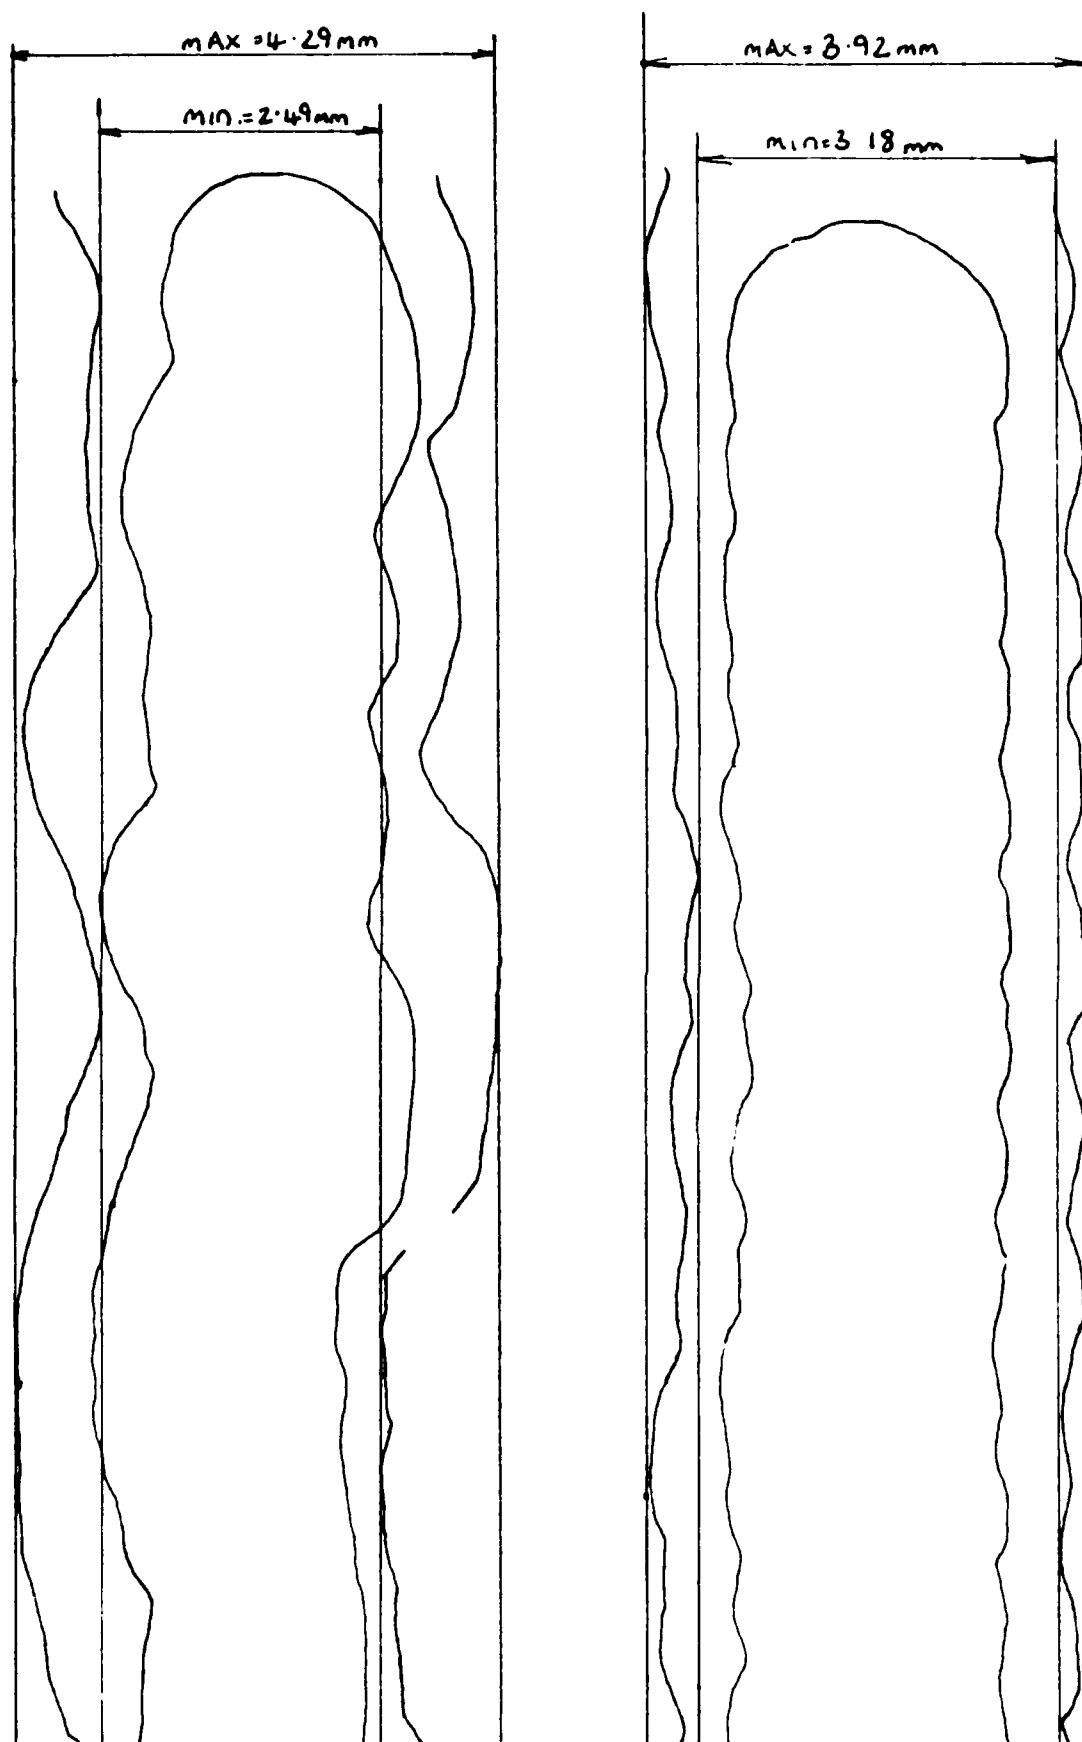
Cross-section of welded walls before and after investigating the effect of weld bead parameters
